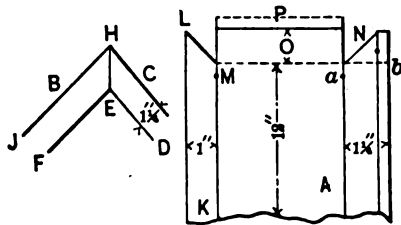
Gauge for Cutting End of Strip to Fit Comb
